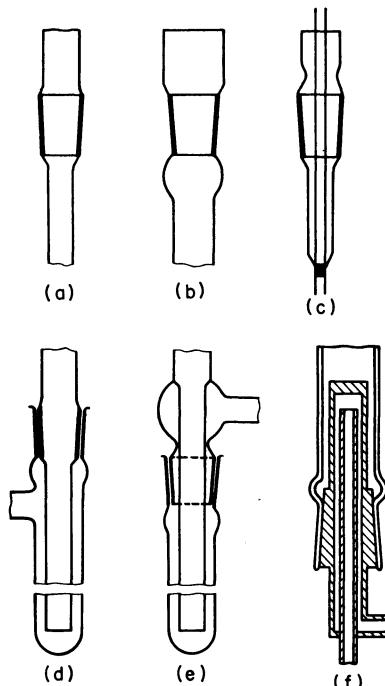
Extended tapered ground joints; (a) extended inner part; (b) extended outer part; (c) extended inner part with lead-through; (d) cooling trap with exhaust pipe on outer part; (e) as (d) on inner part; (f) cooled metal electrode
